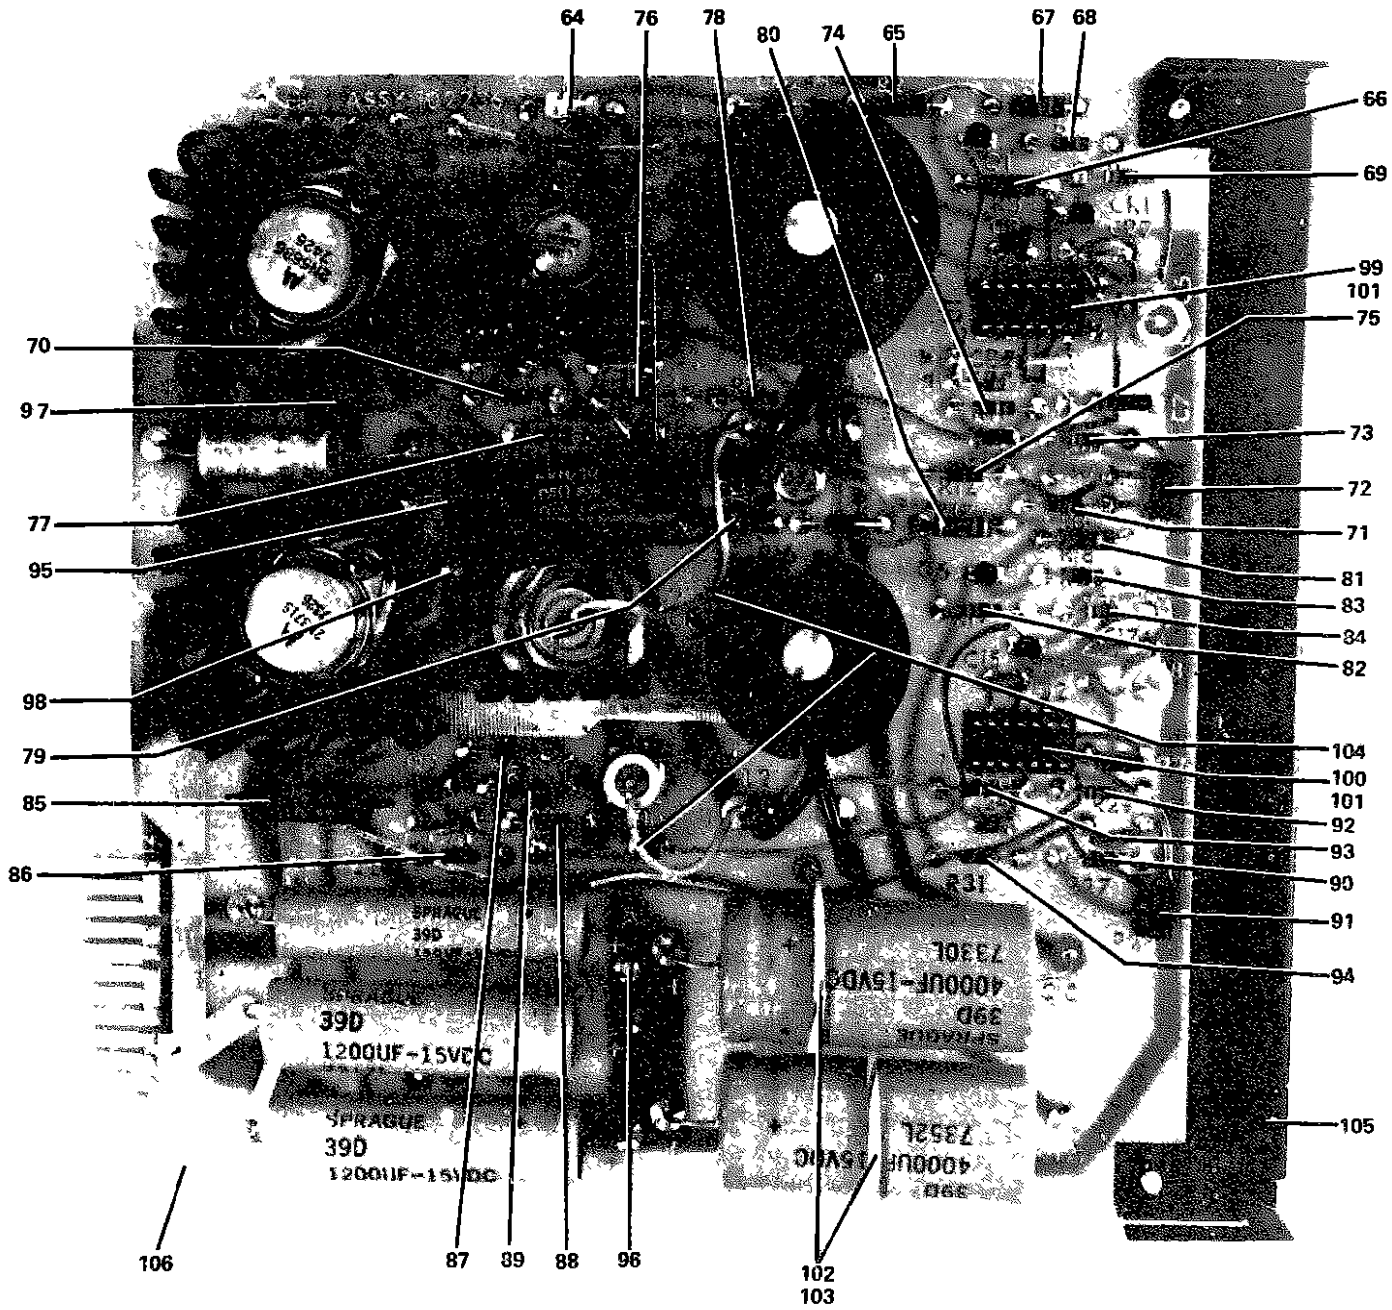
and 12 Volt Power Supply Assembly 1A2A3 (sheet 2 Of 2)
